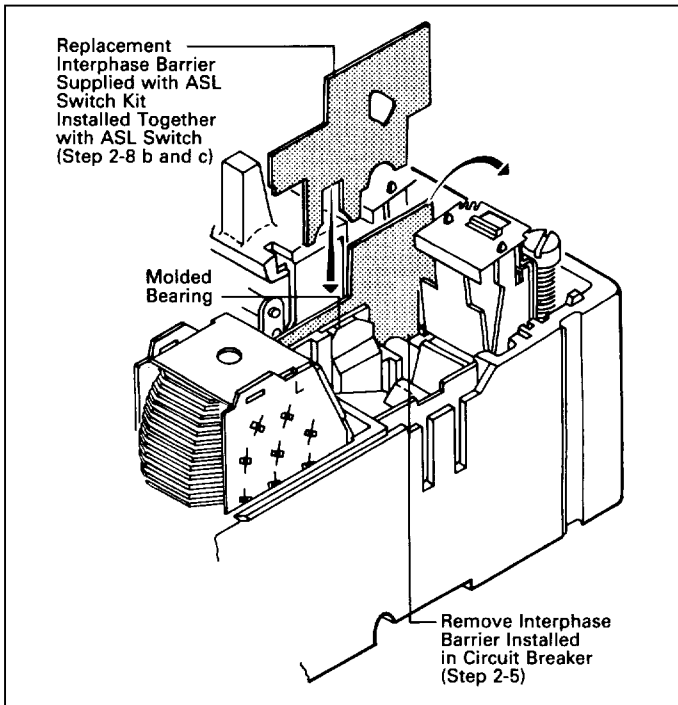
Position of Interphase Barrier and Molded Bearing
